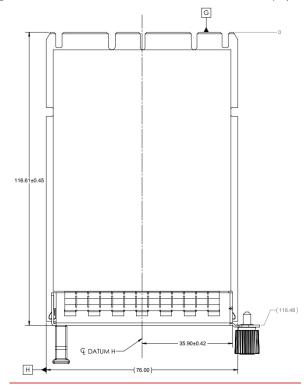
SFF OCP NIC 3.0 Card with Pull Tab CTF Dimensions (Front View)
